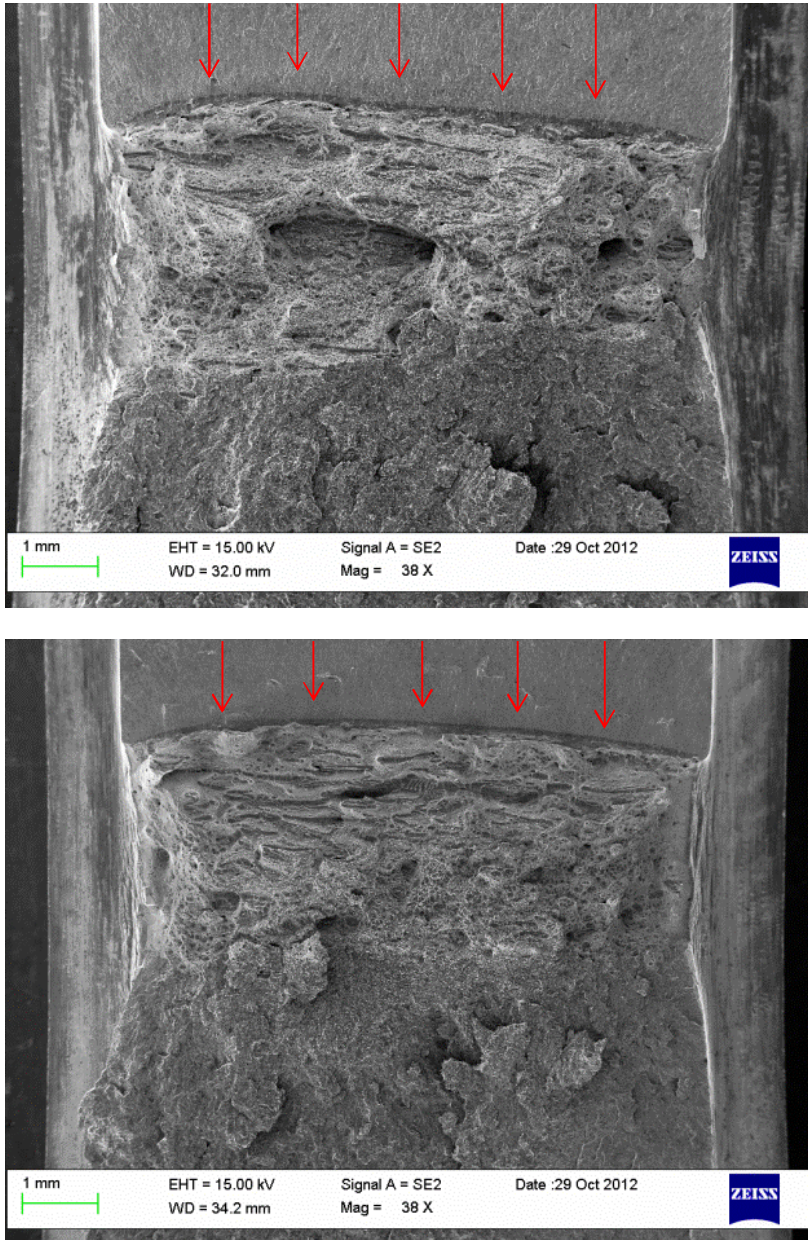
Fracture surfaces of FL1A and FL2B fusion line specimens.
